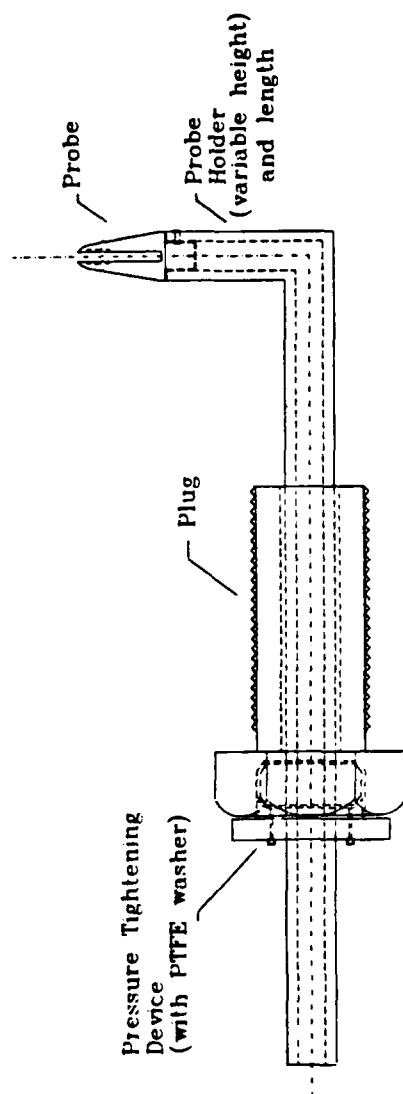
Assembly drawing of 12 mm nozzle apparatus.
